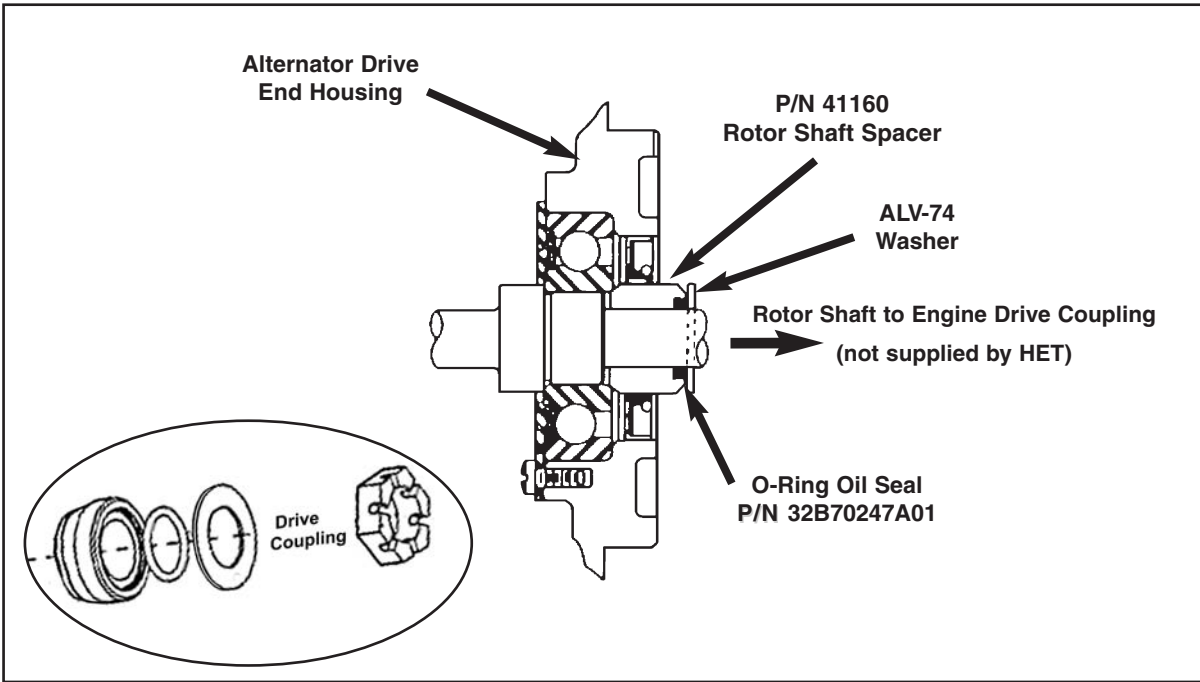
ALV-9510R Alternator Rotor Shaft Spacer, O-Ring & Washer Stack
